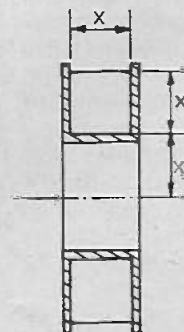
Recommended dimensions of bobbin design. All dimensions are related to 'x' – thus if the measurement specified for 'x' is 1" then the winding width and depth are both 1", and the bobbin internal diameter is 2".
